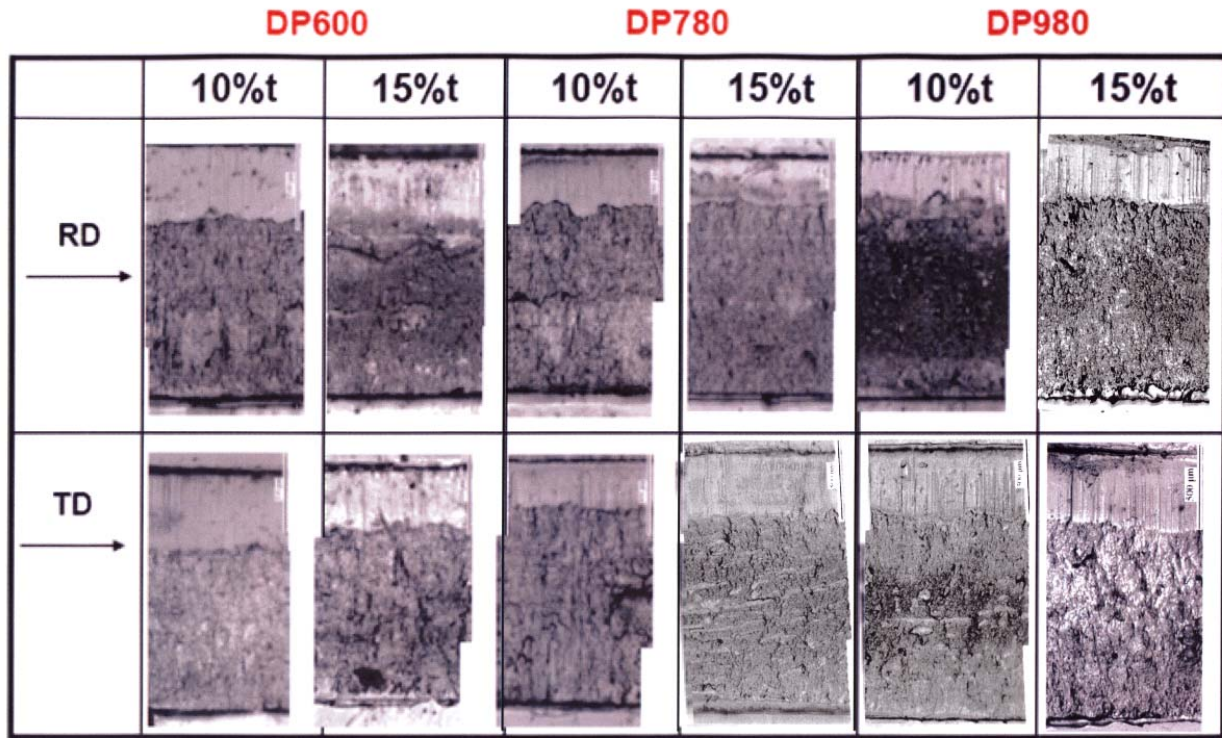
As-fractured surfaces observed from Replica technique, showing burnish and fractured zones for different materials and blank orientations, and die clearances.
